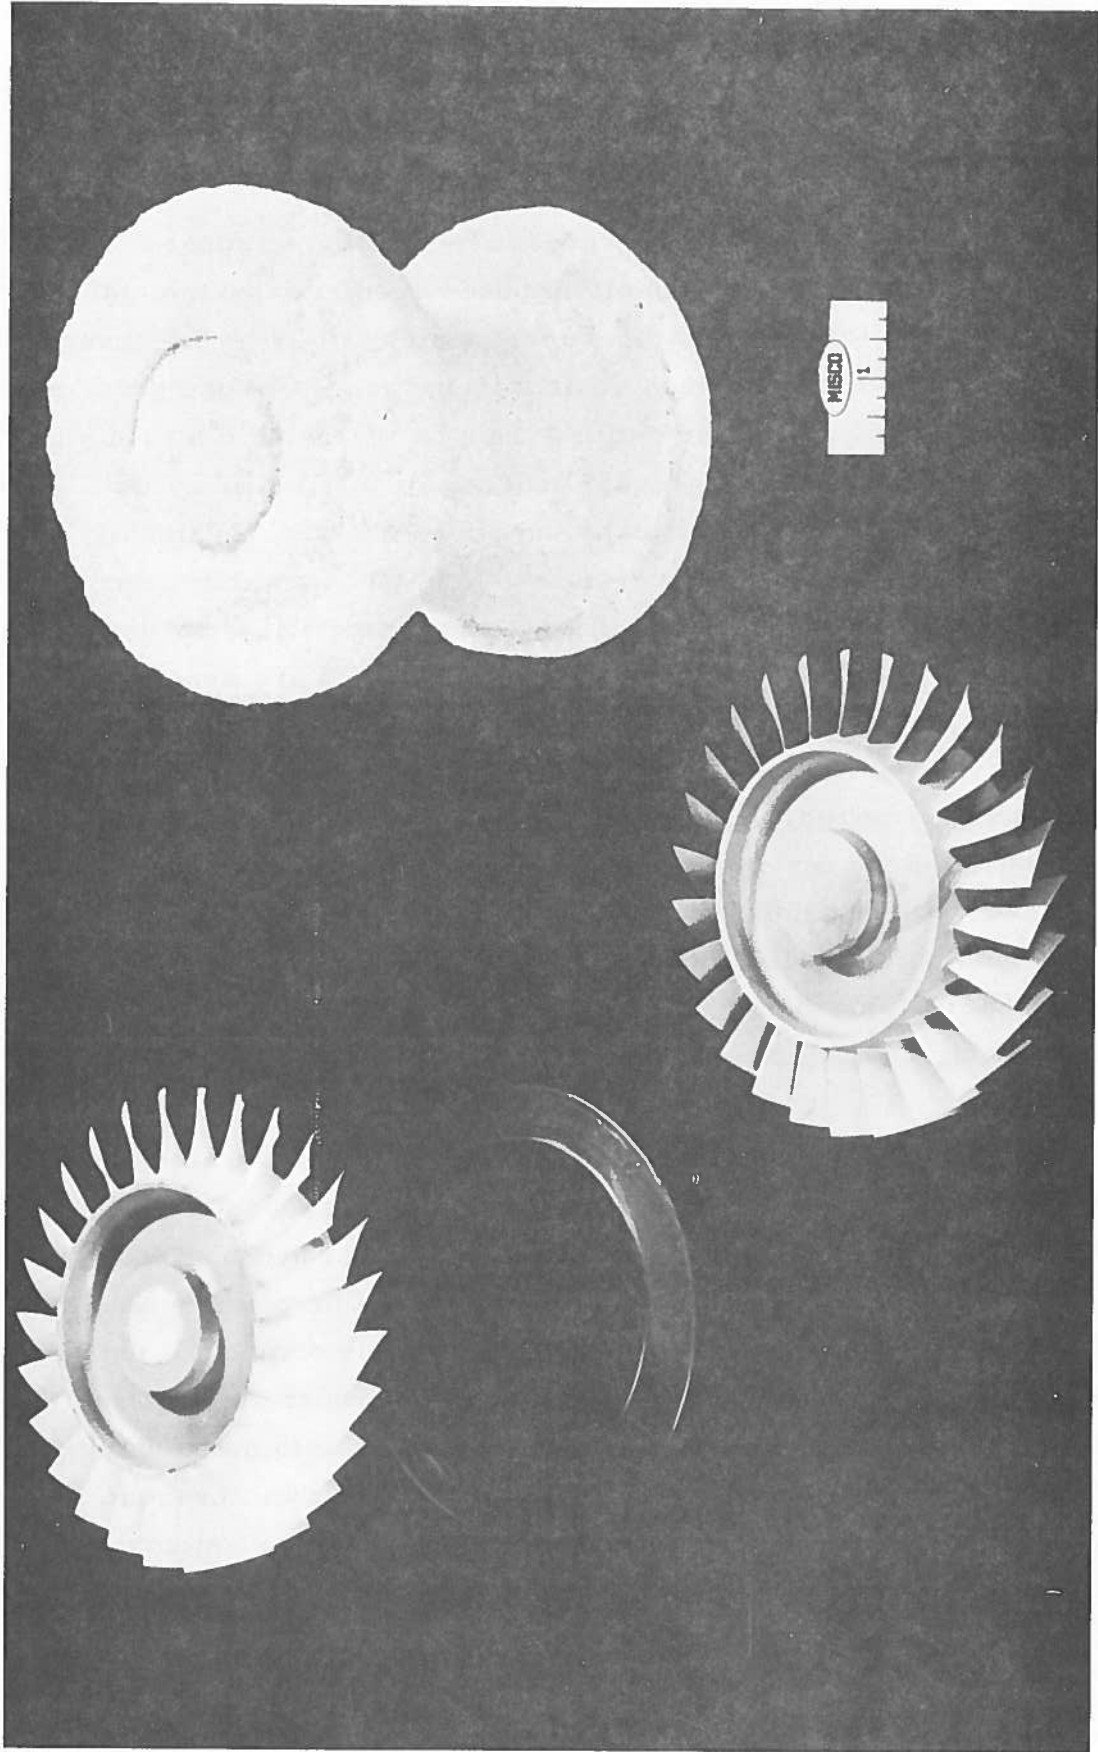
Axial Compressor Rotor Vehicular Turboshaft Engine 17-4 PH (Ref. 3-6)
